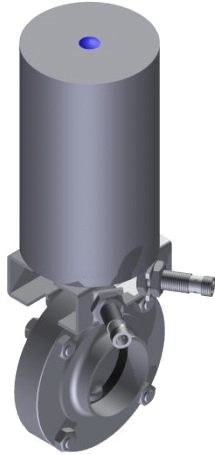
Butterfly valve type SV04 with pneumatic actuator and end position feedback
